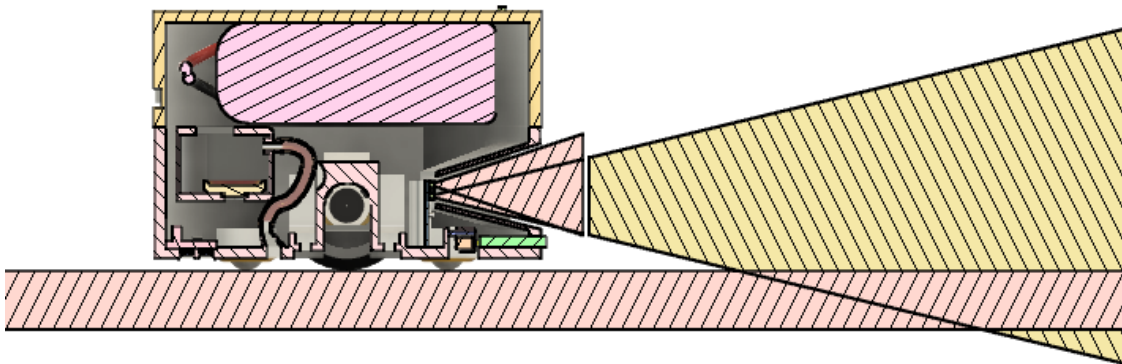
Detailed mechanical design in CAD (Cross-section View)
